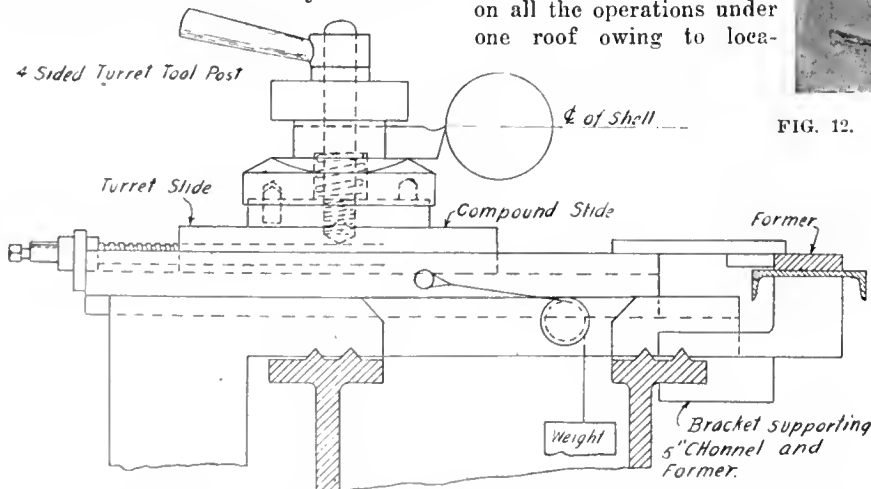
END ELEVATION OF LATHE, SHOWING FORMER AND TURRET TOOL POST FOR OUTSIDE FINISH TURNING.
